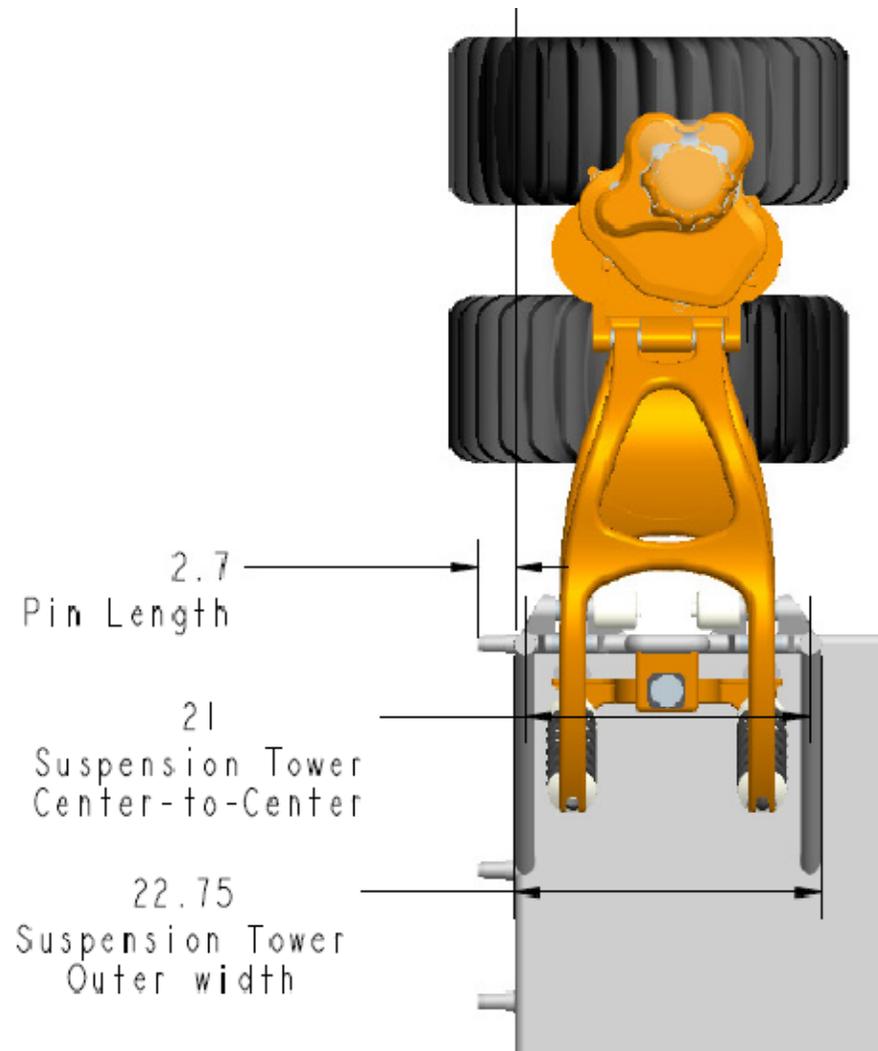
Suspension detail used for fabrication of SEV mock-up.
